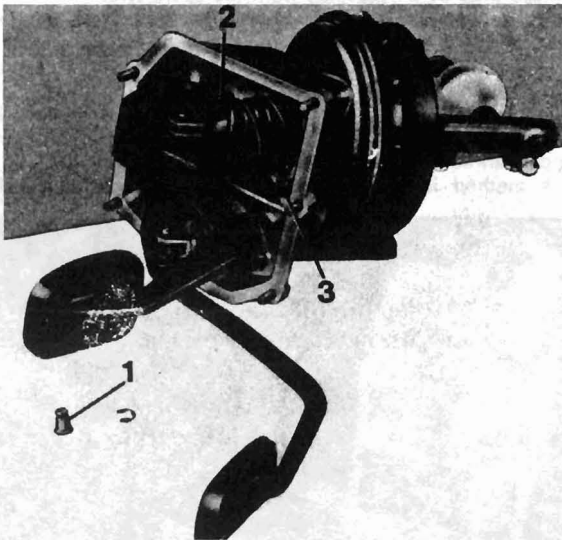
Pedal box/servo assembly (LHD) (Sec 13)
